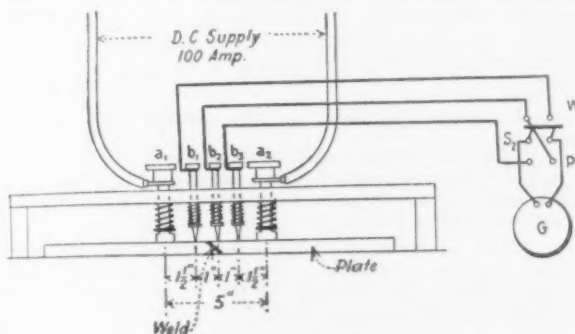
Diagram of Apparatus for Electrical Tests of Butt-Welded Joints of Steel
